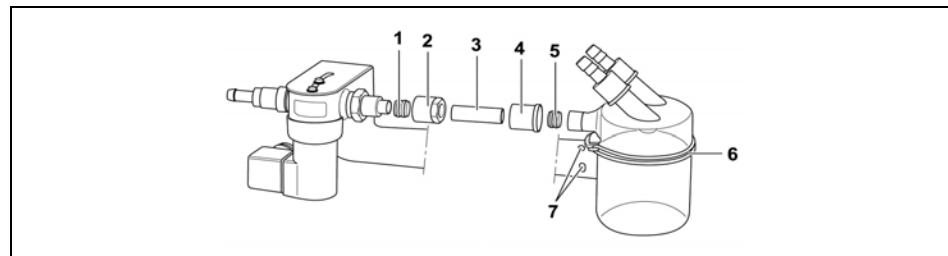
Connecting Woulff bottle and vacuum valve
